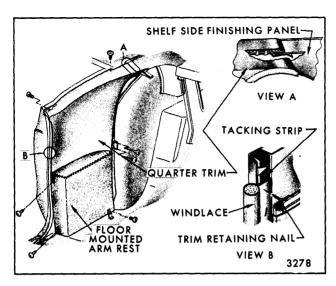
Rear Quarter Arm Rest and Trim Assembly ''49487'' Style
